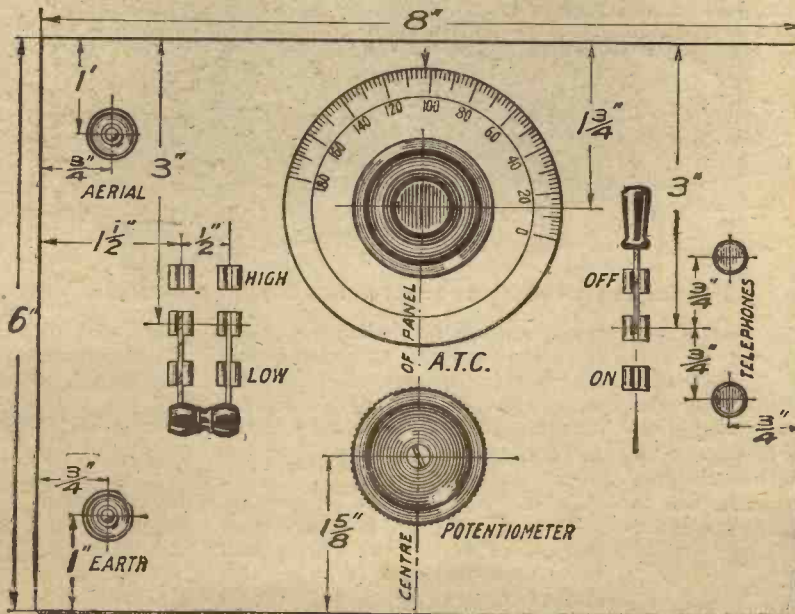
This diagram of the panel layout is exactly half size, and sufficient dimensions for drilling are given.
